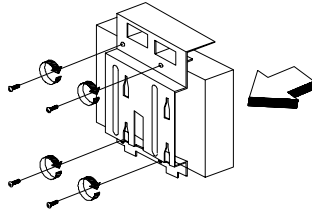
Attaching a Hard Disk Drive to the Bracket
